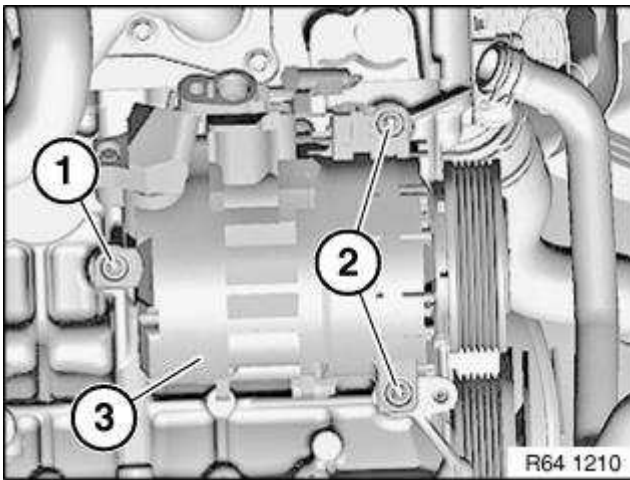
Release Screws (2) And Feed Out Compressor Towards Front
